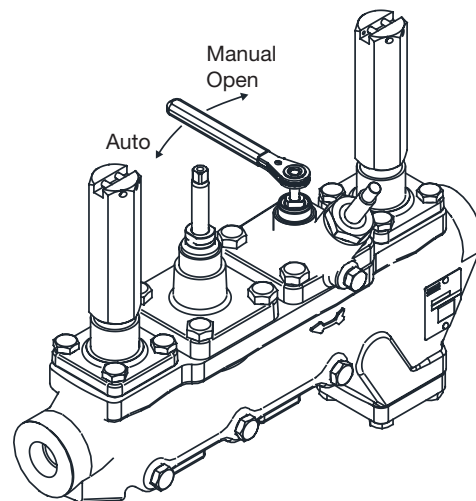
Solenoid/Regulator Control Module Manual Opening Stem.
